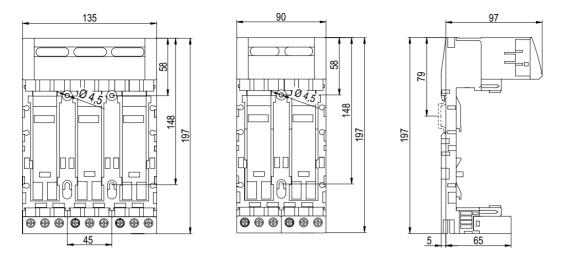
Dimension drawing of extension blocks featuring outgoing terminals with screw-type connection technology
